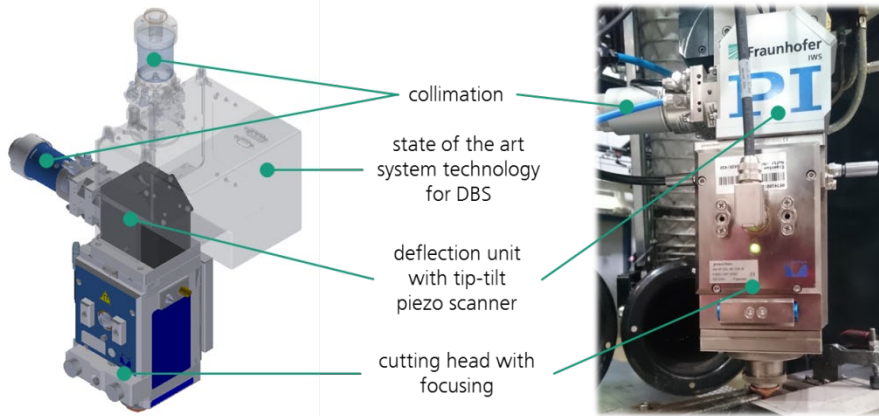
Setup of dynamic beam shaping in a laser cutting head using a tip-tilt piezo platform scanner; left: schematic illustration demonstrates the reduced installation space compared to state of the art system technologies; right: experimental setup
